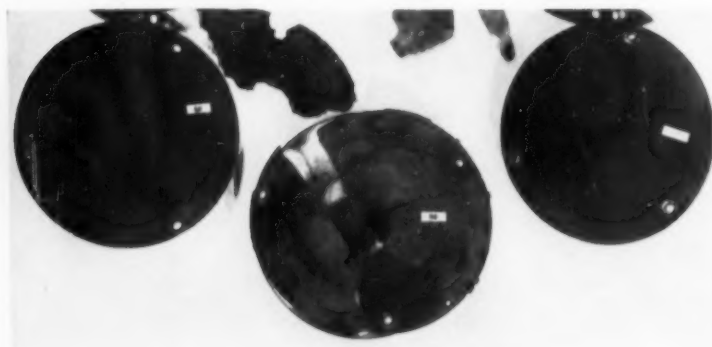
Three Plates With Laminated Coatings After Testing. The first and third tests stood up well, while the second (which includes a molybdenum liner) failed. However, the plate did not burn through
